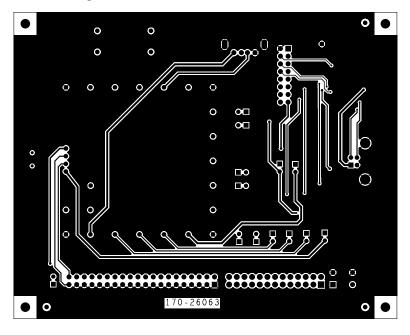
The Bottom Side Layer of the KIT34825EPEVME Evaluation Board.
